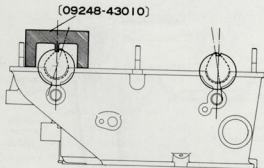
Camshaft Valve Timing Alignment Y5196
